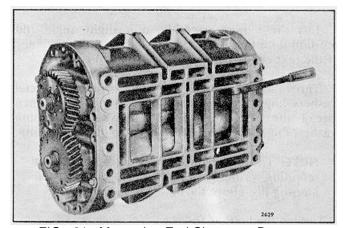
Measuring End Clearance Between Blower Rotors and End Plate
